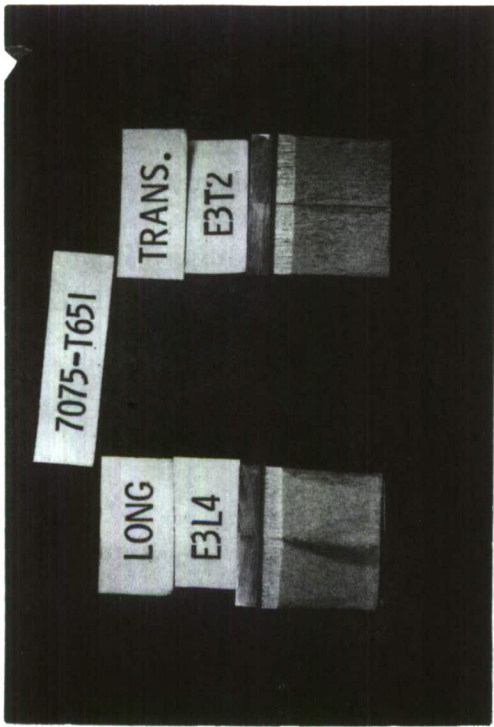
Fracture Surfaces of Representative Specimens
